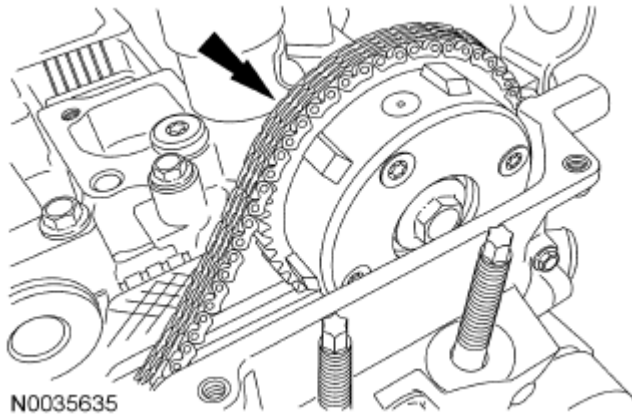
Locating Timing Chain On Intake Camshaft Drive Gear
